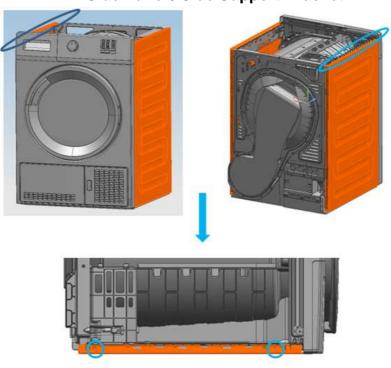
Screws between the side panel and side support bracket (Water Tank Side)
